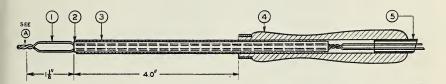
Gas-sampling and draft tubes, thermocouple, and support bracket assembly.
